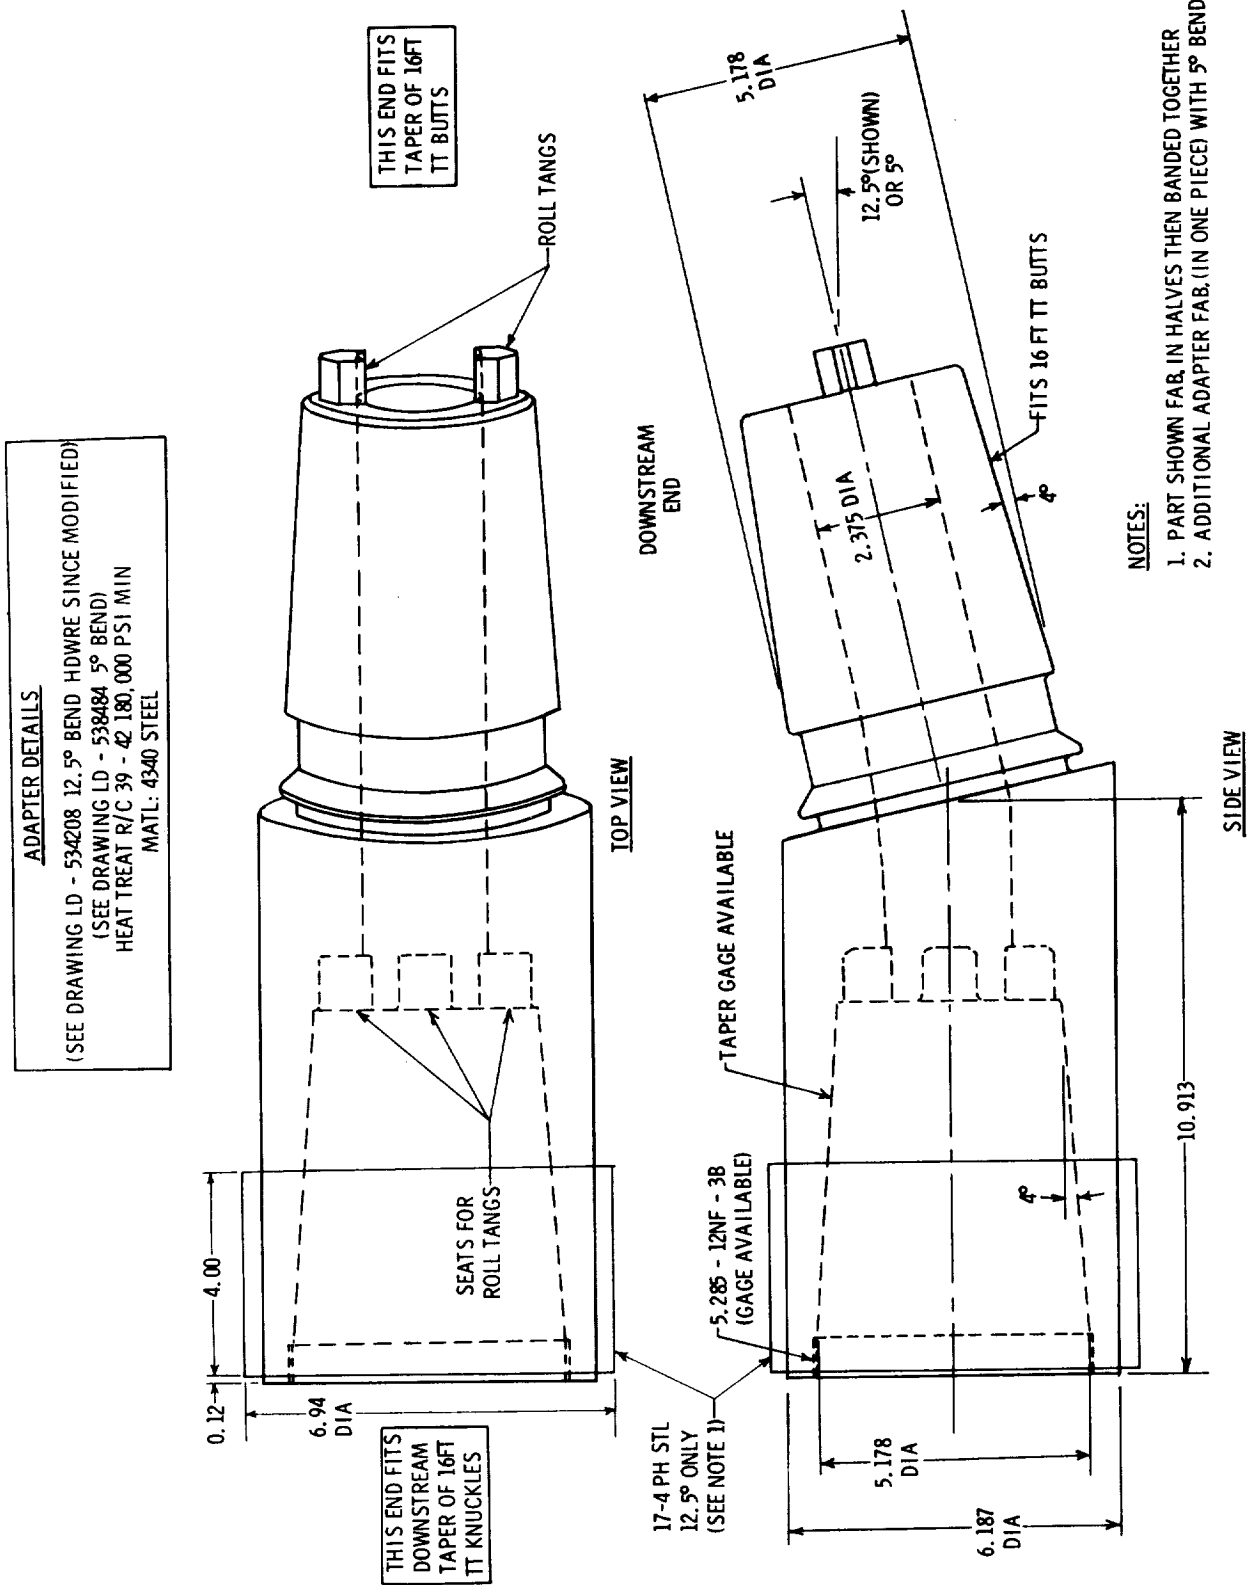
Sketch of knuckle adapters LD-534208 and LD-538484. (All dimensions are in inches unless otherwise indicated.)
